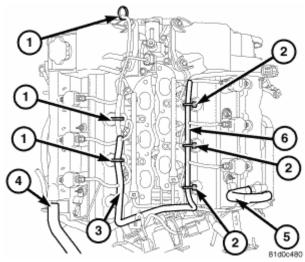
Identifying 2.7L Engine Wiring Harness Courtesy of CHRYSLER LLC
